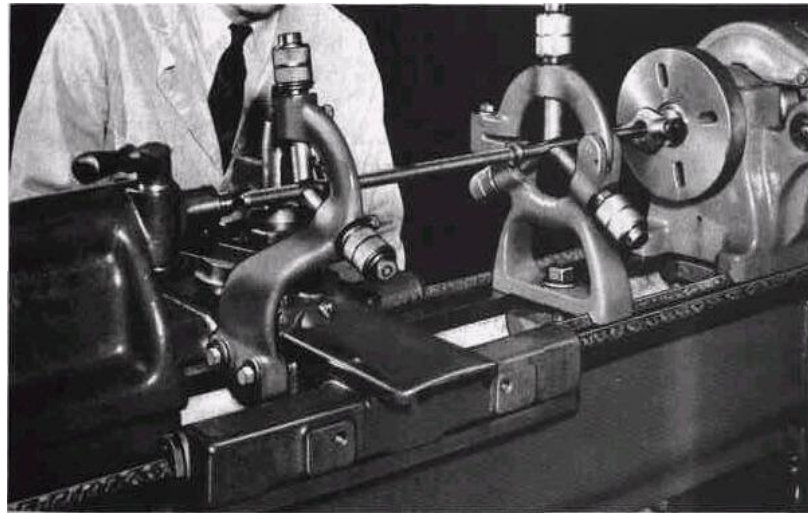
Using both steady rest and follower rest for cutting threads.
